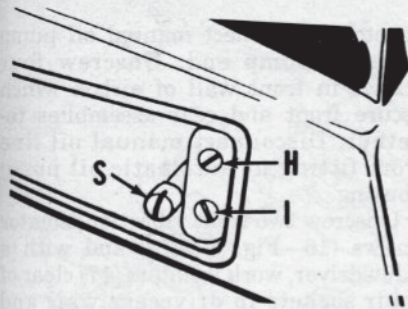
View showing location of carburetor high speed mixture screw (H), idle mixture screw (I) and idle speed screw (S).
